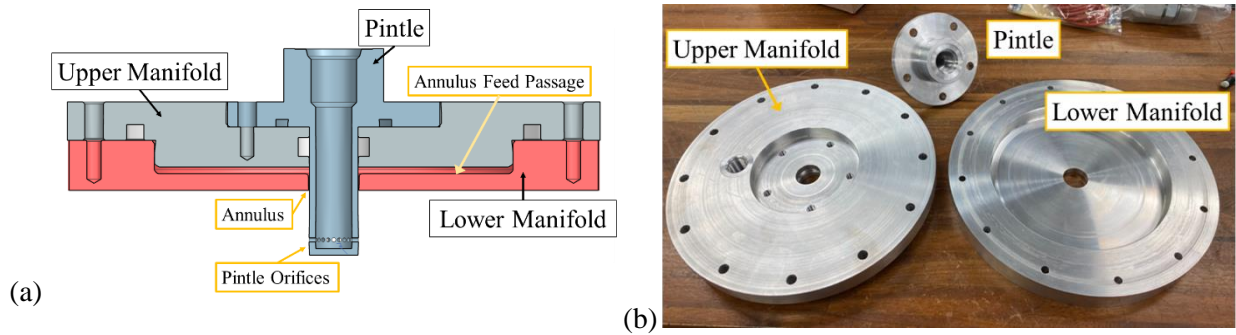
Illustration of the pintle used as a test article, with (a) a cross-sectional view of injector CAD and (b) the disassembled aluminum 6061 prototype.
